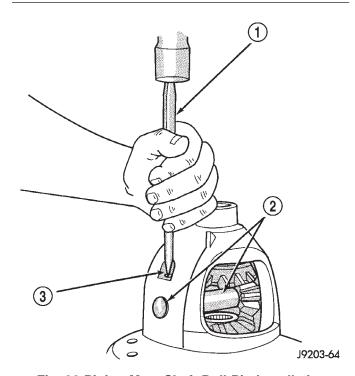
Pinion Mate Shaft Roll-Pin Installation
